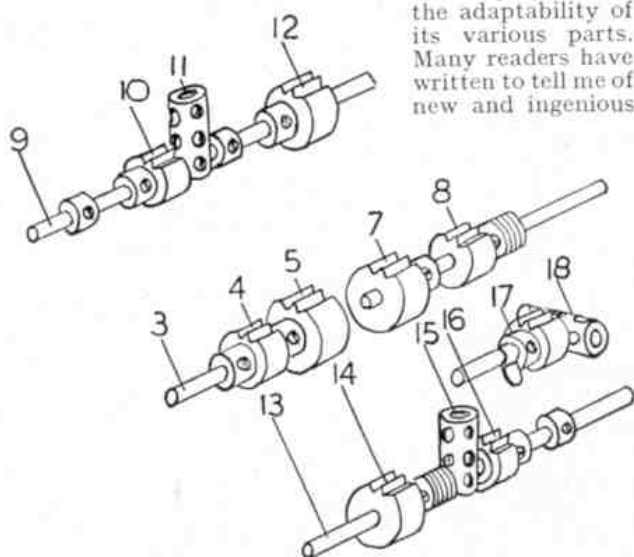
These drawings show the arrangement of the gears and shafts in the three-speed and reverse gearbox seen in Fig. 1.
